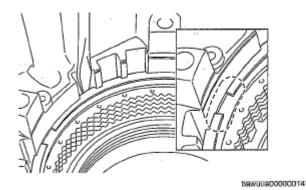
Removing Snap Ring Courtesy of MAZDA MOTORS CORP.
